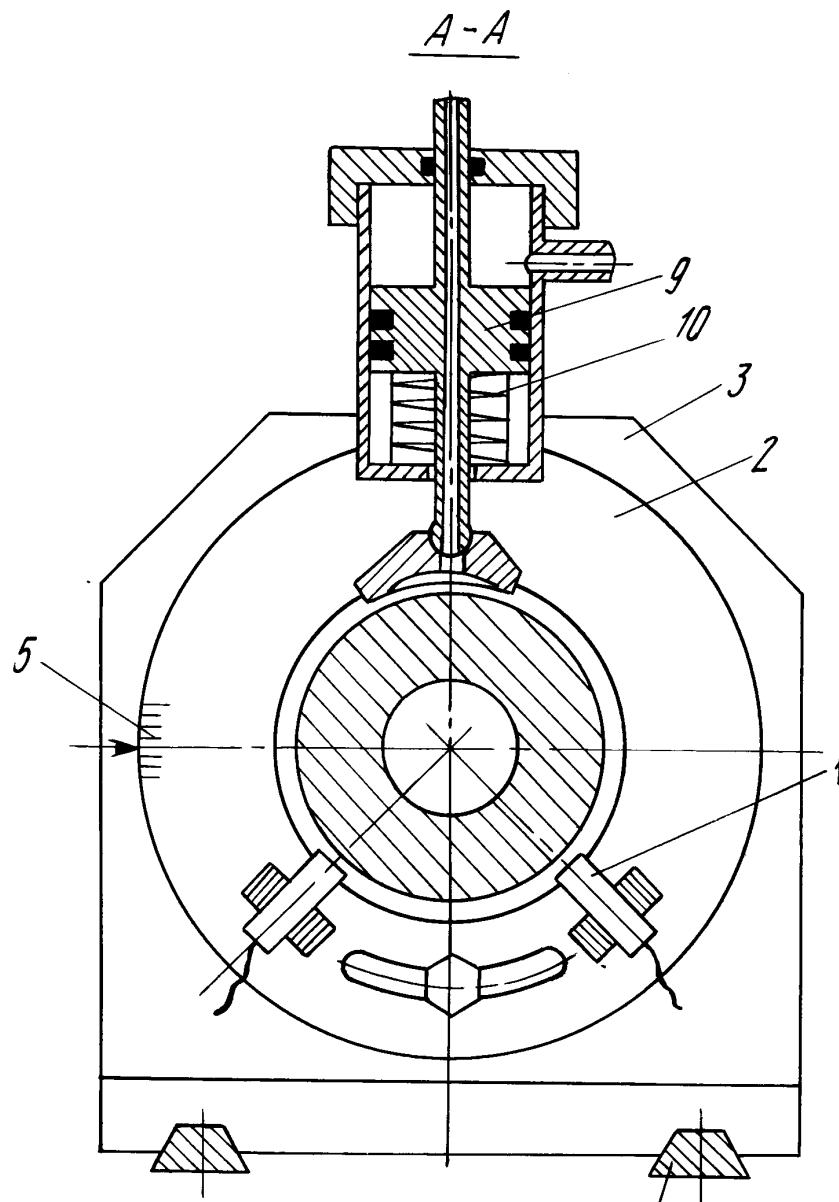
A device for determining the radial dynamic stiffness of spindle knots of metal cutting machines. View B.
